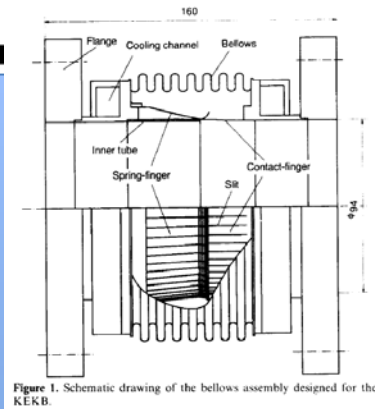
Schematic drawing of the bellows assembly designed for the KEBB
